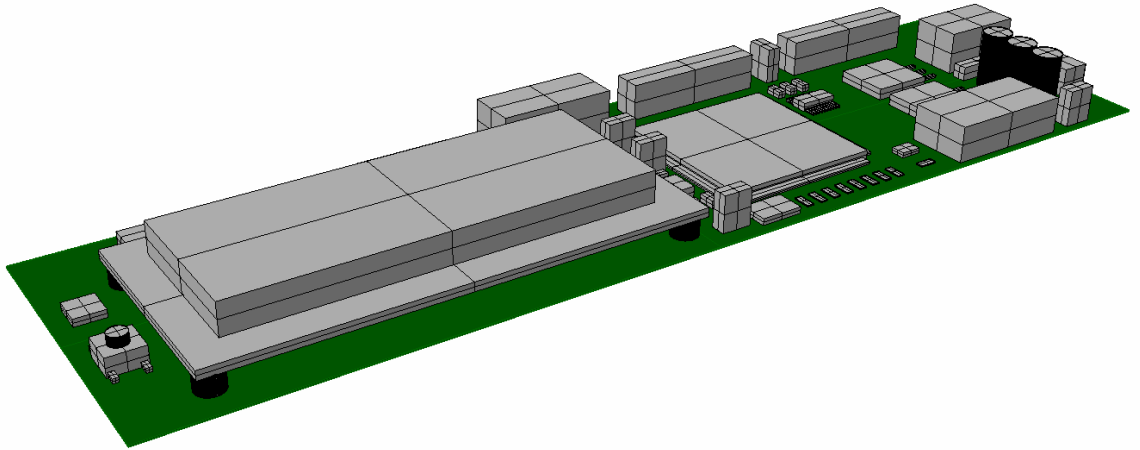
Export the board in the STEP format, and import to your preferred mechanical CAD tool.
